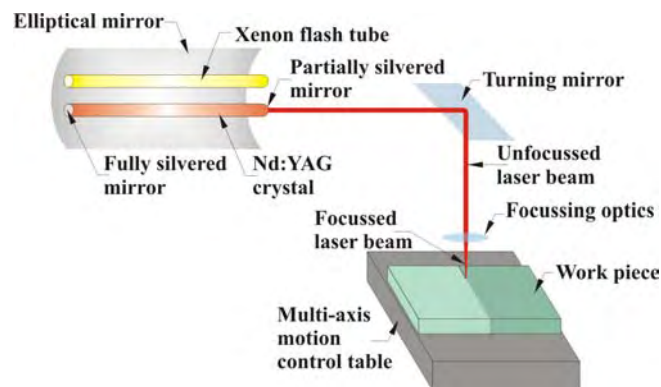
Laser welding system (adapted from www.joiningtech.com)
